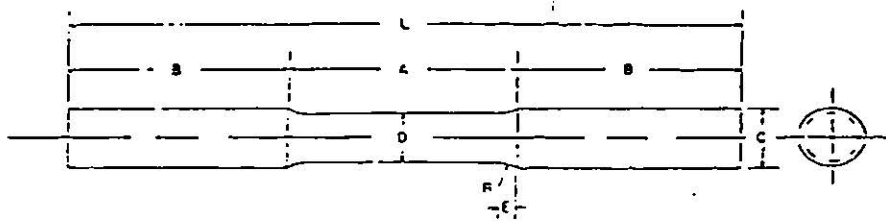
Test Coupons for Castings (see Table 1 for Details of Design)
